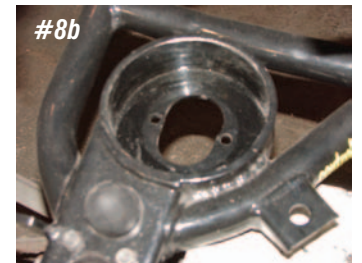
, 8b & 8c: If the car has tubular lower control arms, there may be a lower coil spring cushion. This cushion will need to be removed before installing the new coil-over shock conversion. On a stock lower control arm, the holes for the lower shock mount are 5/16". These holes need to be drilled out to 3/8" for the coil-over shock conversion.
